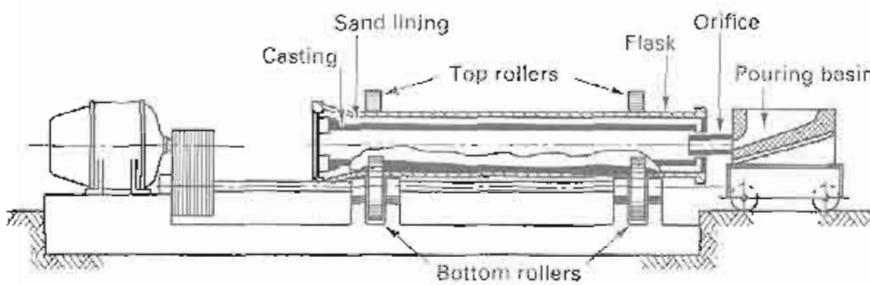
Schematic representation of a horizontal centrifugal casting machine. (Courtesy of American Cast Iron Pipe Company, Birmingham, AL.)
